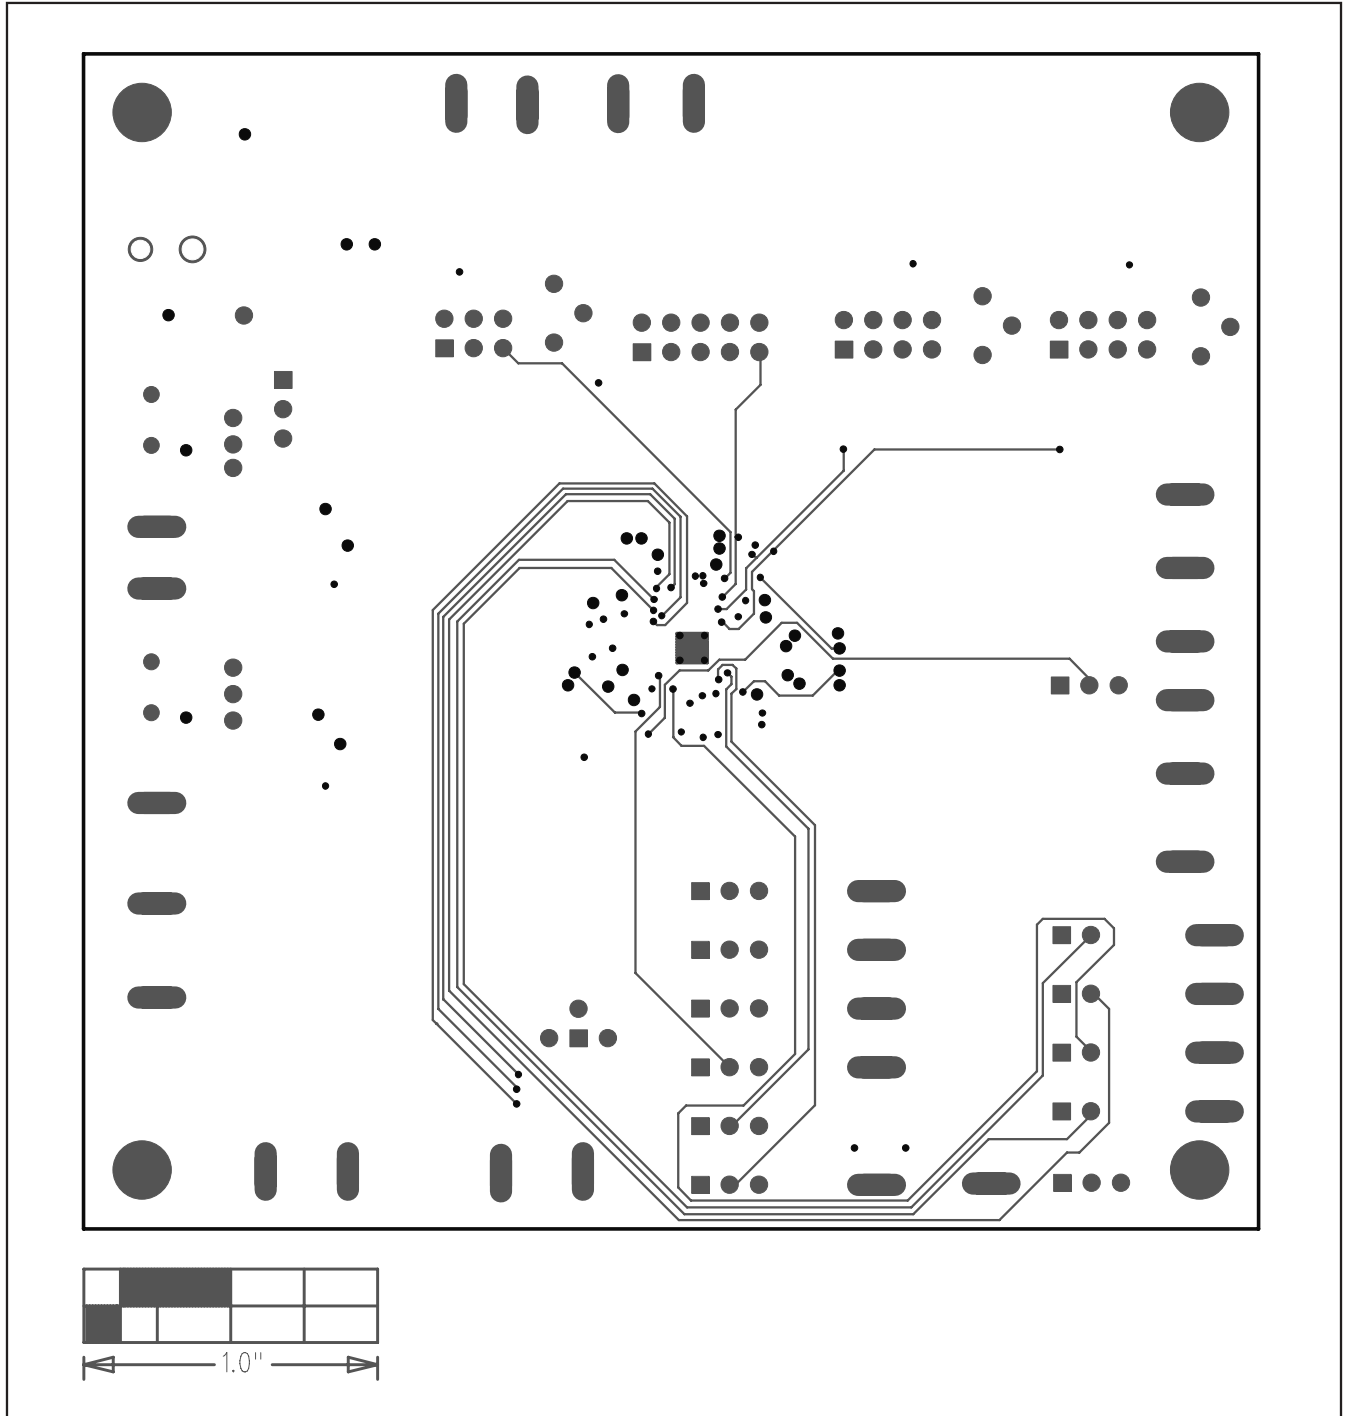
MAX8671 EV Kit PCB Layout—Solder Layer 6
